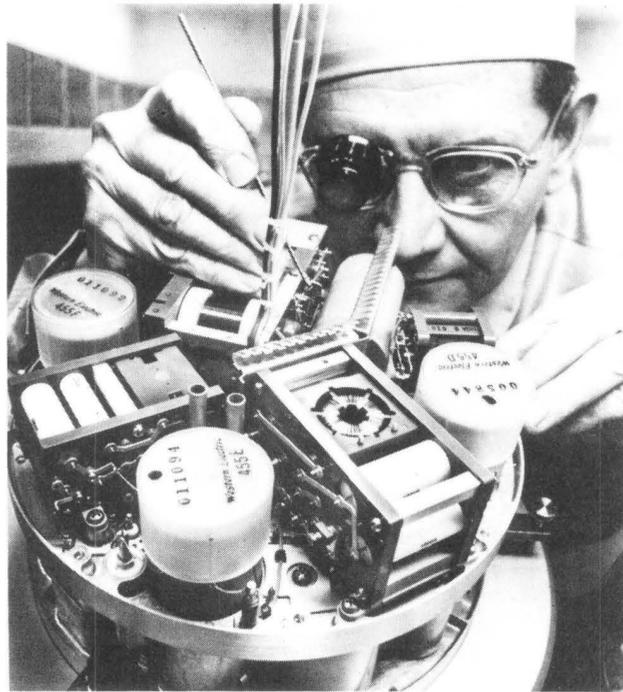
Cordwood packaging of SD repeater components. The packaging arrangement made all soldered connections accessible for inspection.
